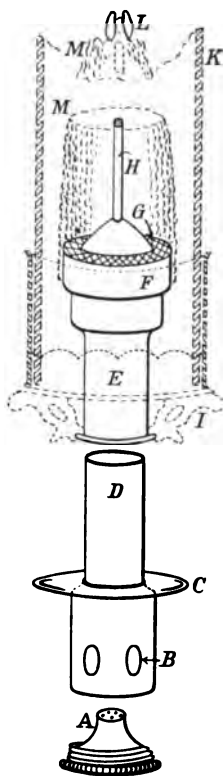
Diagrammatic drawing of a Welsbach "C" burner.
